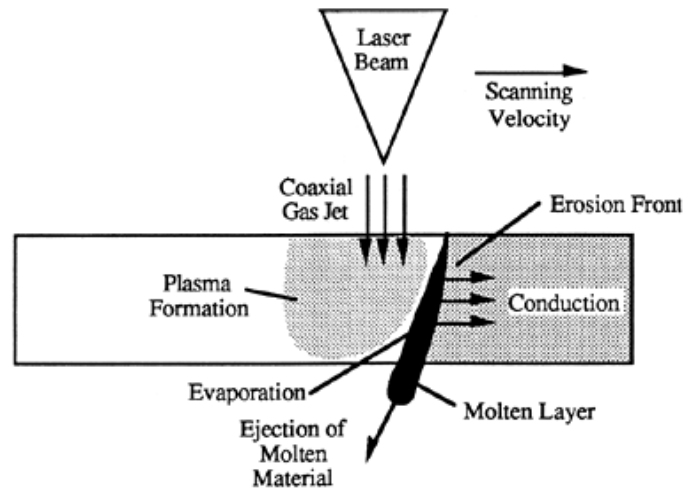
Schematic illustrating the process of thermal laser machining.
